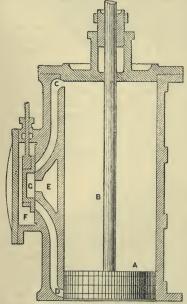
Parts of cylinder. A, piston; B, pistonrod; C, D, steam-ports; E, exhaust.
